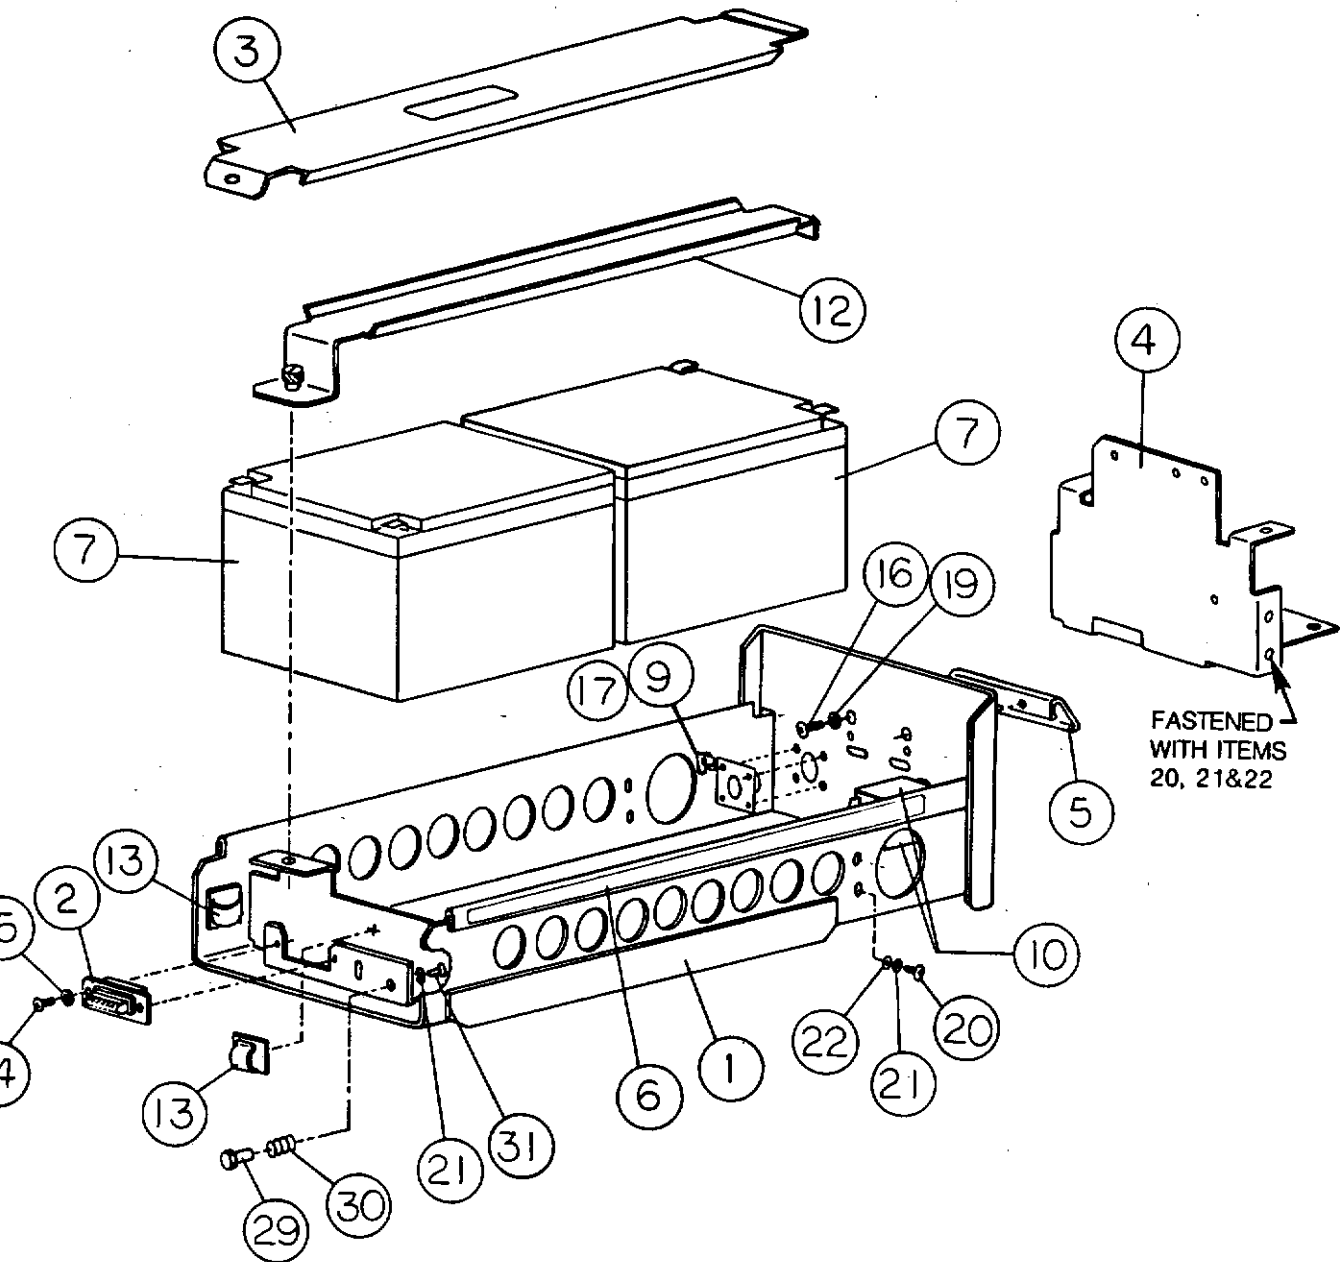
PARTS LOCATION DIAGRAM, BATTERY TRAY ASSEMBLY
